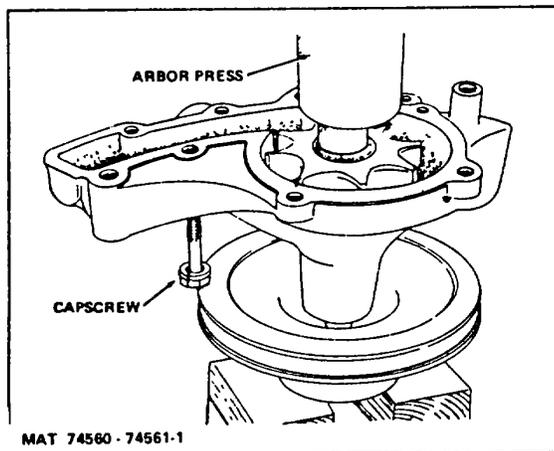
Water Pump Assembly Showing Inserted Capscrew, Prior to Pulley Press Fit.
